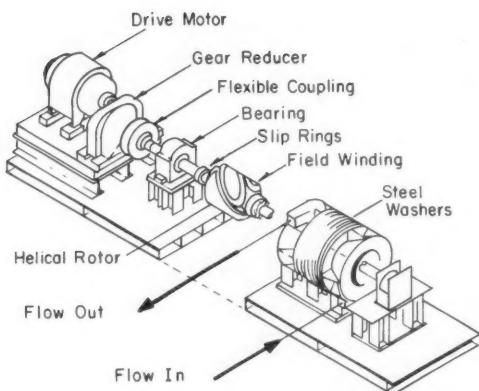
Exploded view of helical-rotor electromagnetic pump.⁹
